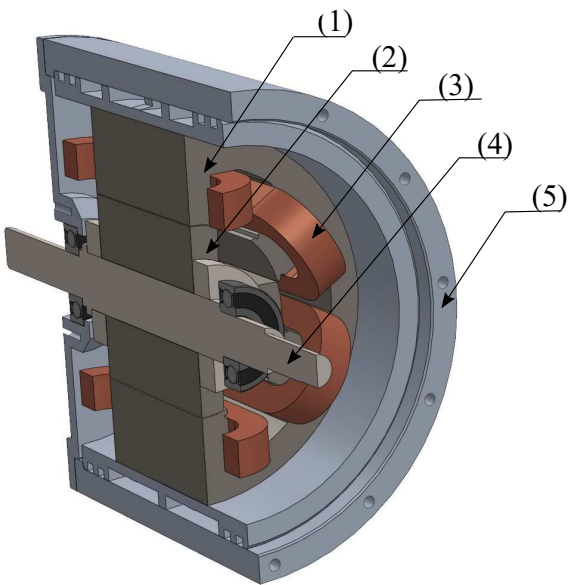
SRM construction: (1) stator core, (2) rotor, (3) wind-ings, (4) shaft, (5) housing.
